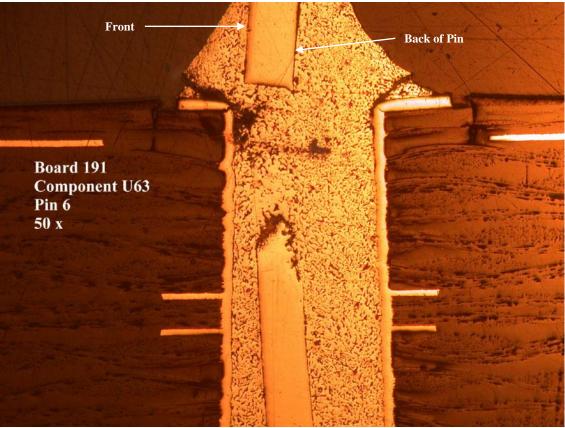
PWB 191 - U63, Pin 6 Cross-Section
